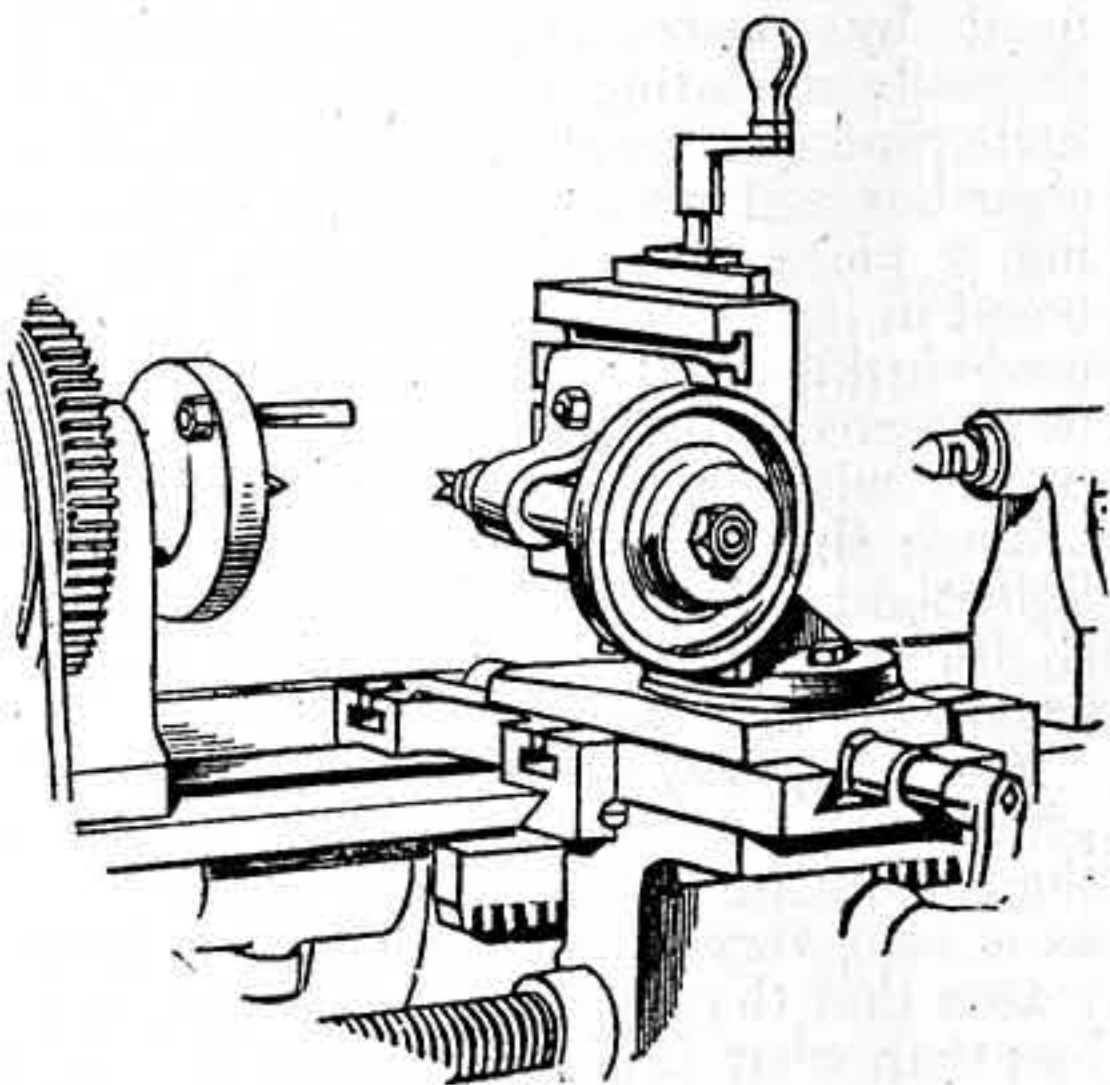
Gear-Cutter arranged for Slot-Drilling.
